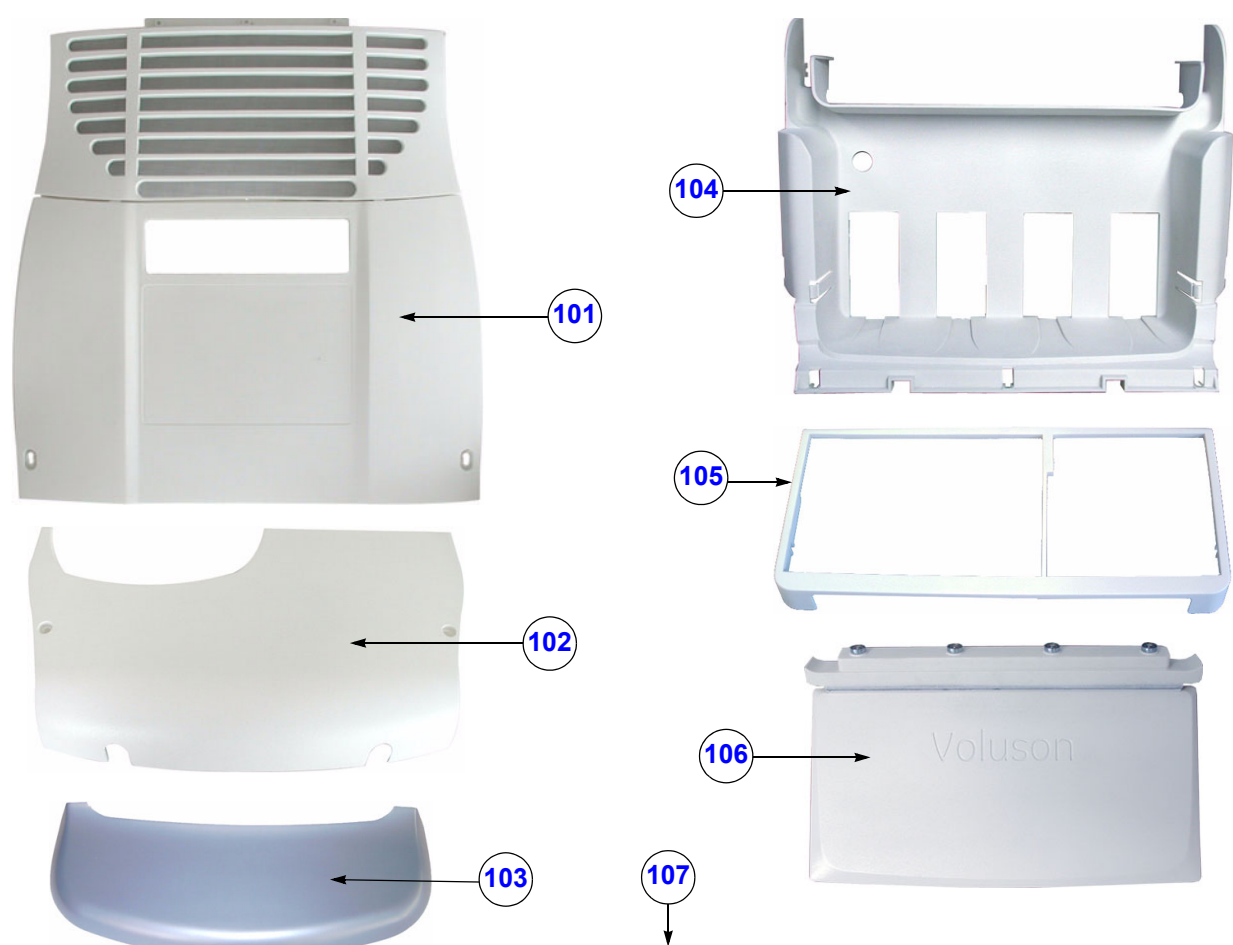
Housing - Mechanical Hardware Parts & Covers
